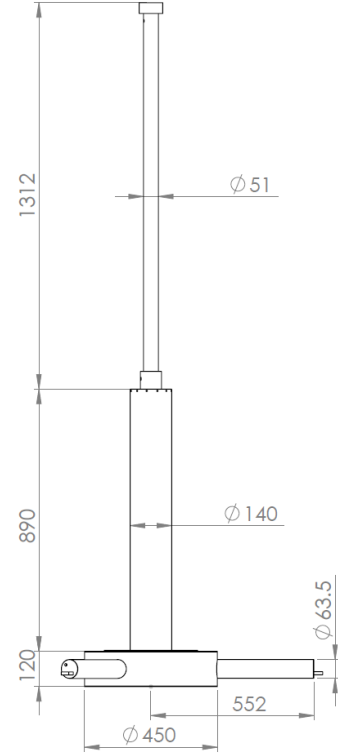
Dimensions of base model (mm) with no outer cylinder.
